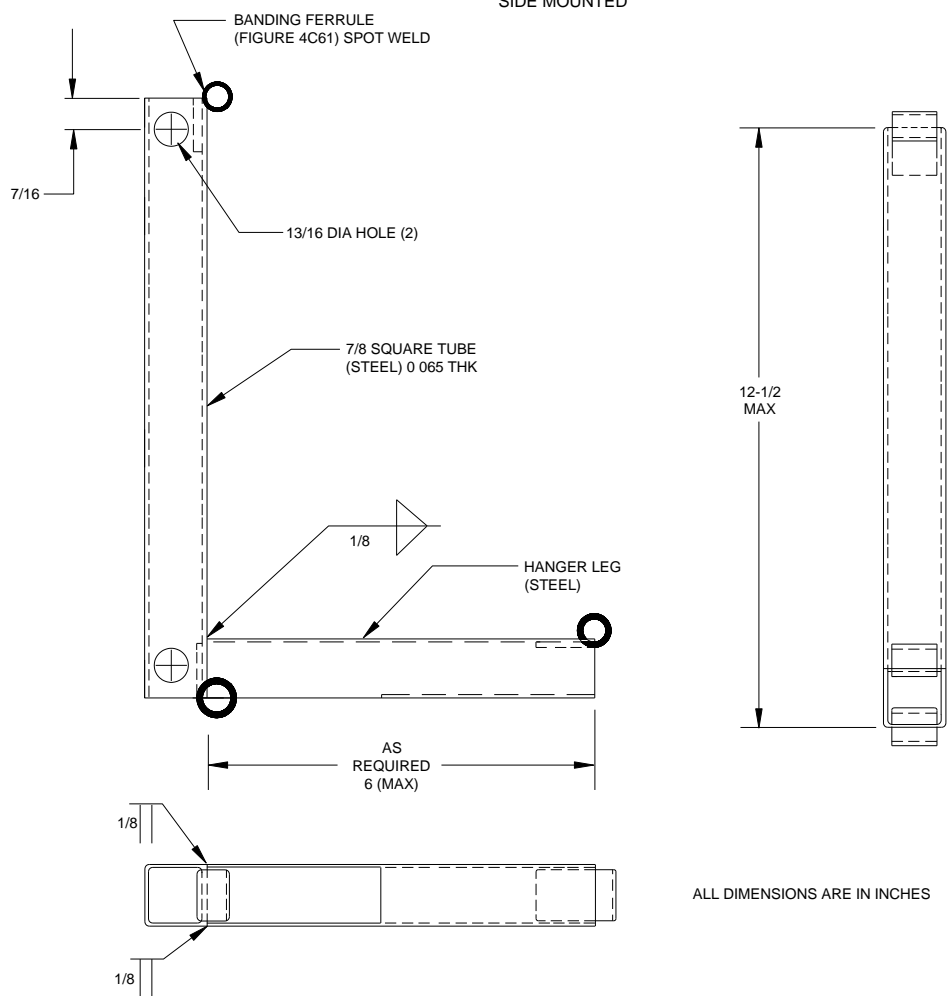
A26. Tubular hanger details "L" shape for submarines.
